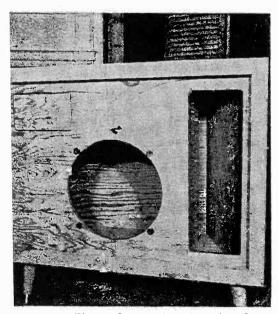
Construction view of enclosure at end of trial assembly. Tweeter hole cover plate, upper left, is in place.
